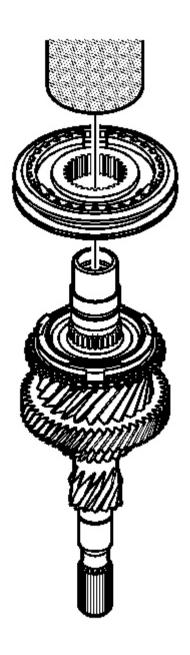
Installing 3rd/4th Gear Synchronizer Assembly Courtesy of GENERAL MOTORS CORP.
